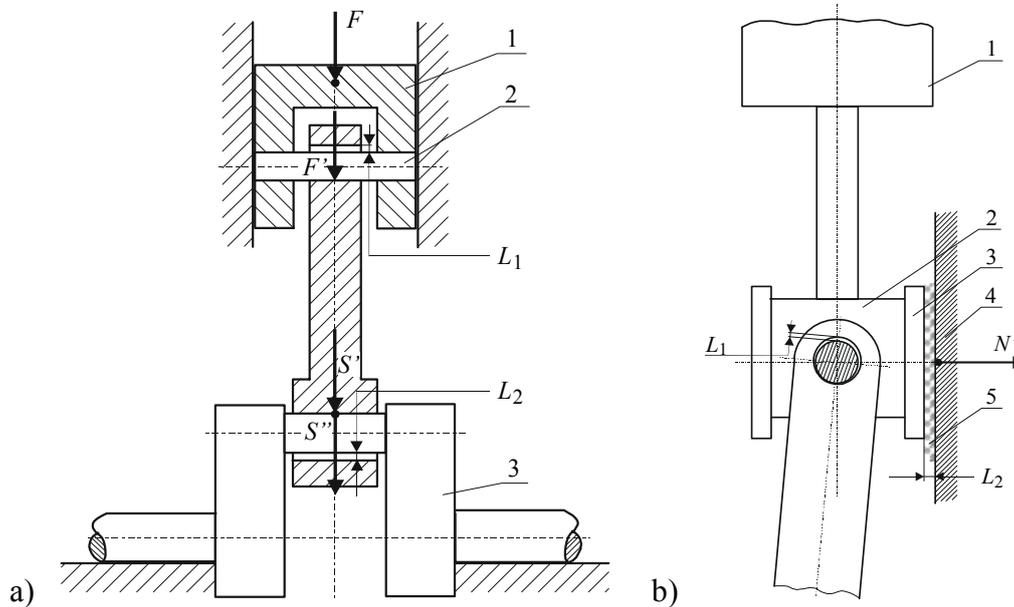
a) Forces generating vibrations of connecting-rod and crank: 1 – piston, 2 – piston pin, 3 – crank;  $L_1$  – clearance in connecting-rod head bearing,  $L_2$  – clearance in connecting-rod big end bearing, b) forces generating vibrations of slideways: 1 – piston, 2 – crosshead, 3 – slide, 4 – slideway, 5 – separation liquid;  $L_1$  – clearance in connecting-rod head bearing,  $L_2$  – clearance between slides and slideway [1]
